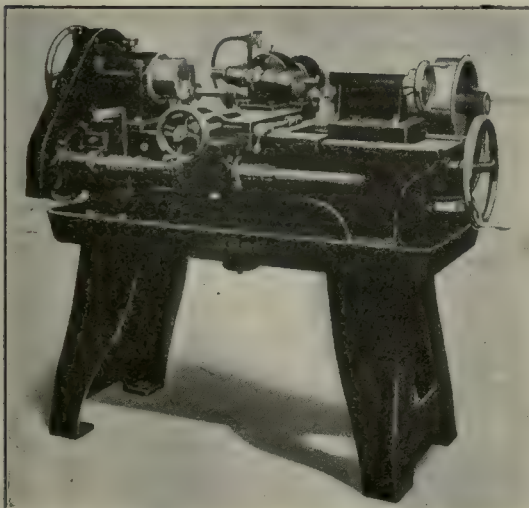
SIZE "A" STANDARD SWIVEL HEAD (EQUIPPED FOR BAR AND CHUCK WORK)
